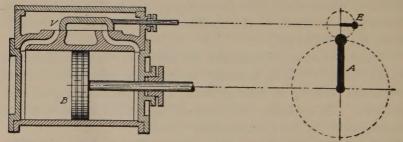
Position of Piston and Valve in Cylinder Shown in Fig. 3, after One-Half Stroke
